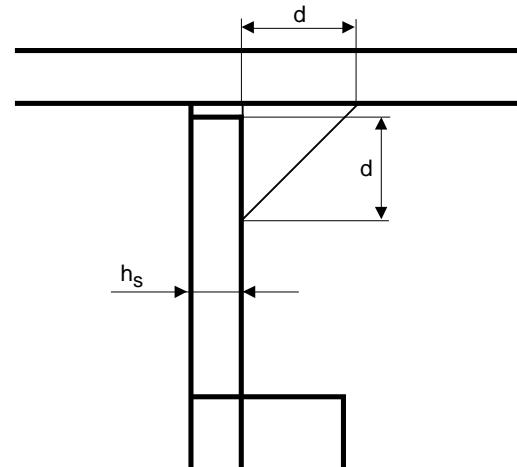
Bracket at lower end of secondary stiffener on plane bulkhead
